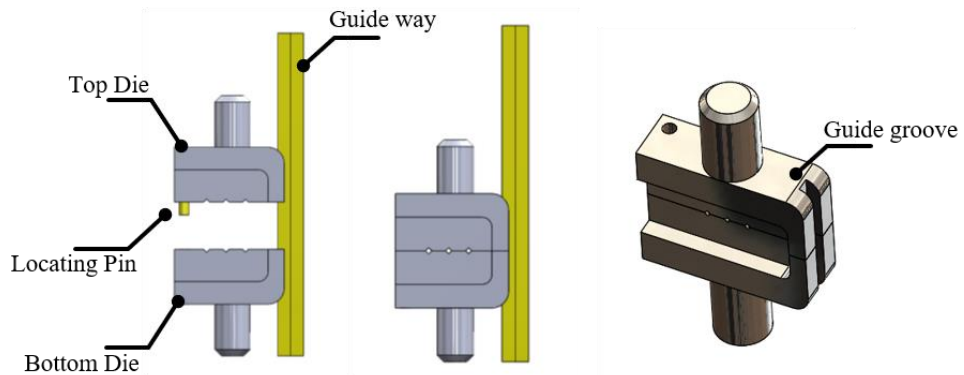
Design of swaging die guided with a guide groove and locating pin
